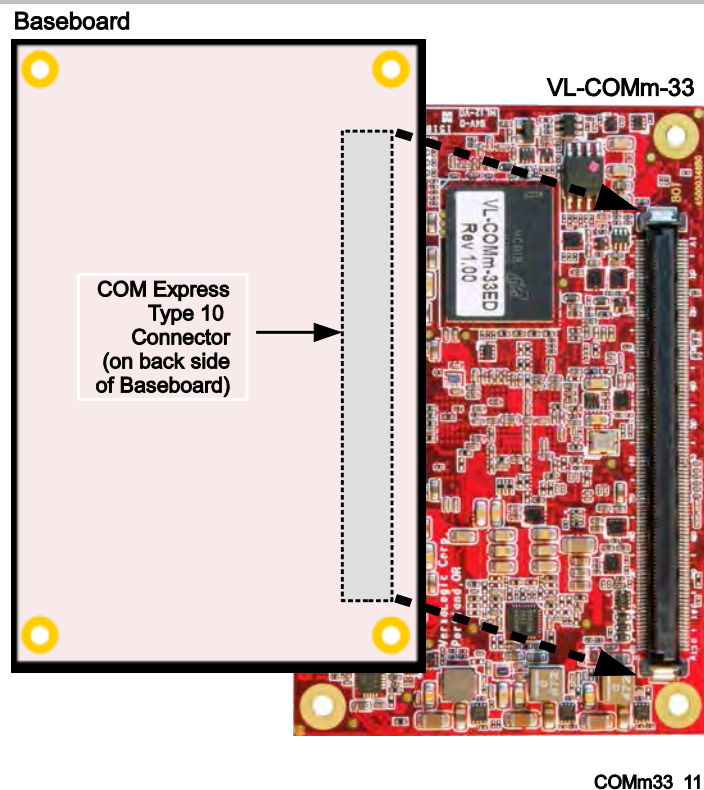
Attaching the VL-COMm-33 to the Baseboard
